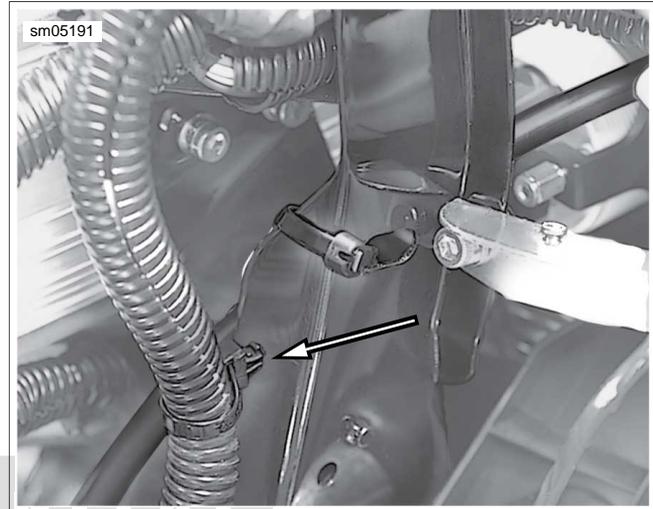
Anchor Convoluted Tubing of Headlamp Connector to Fairing Bracket (Left Side)
